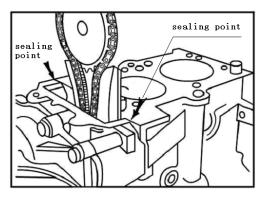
The jointing surface between cylinder block and timing chain cover
